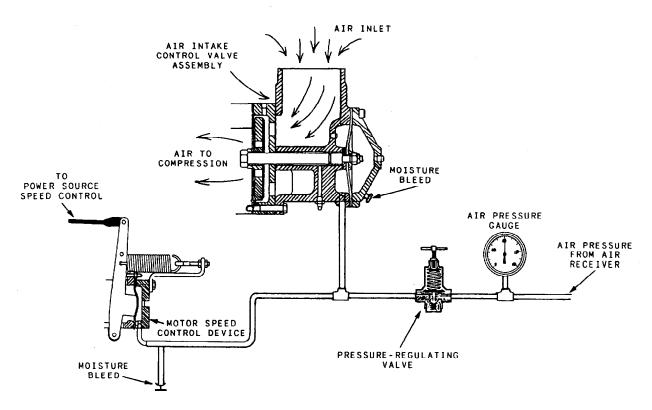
Pressure control system for a rotary vane air compressor.
